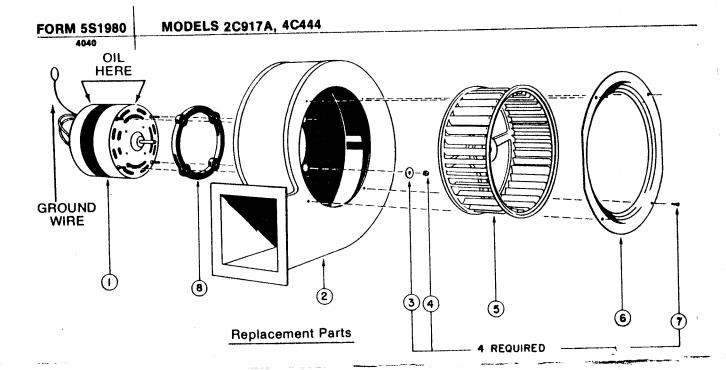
Exploded-View Illustration and Mounting Dimensions
